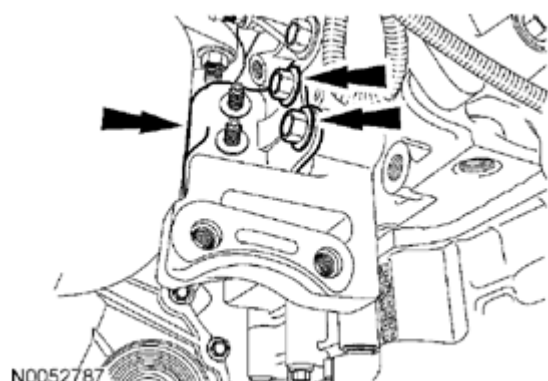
Locating Bolts And RH Exhaust Heat Shield Bracket (Inboard Half)
